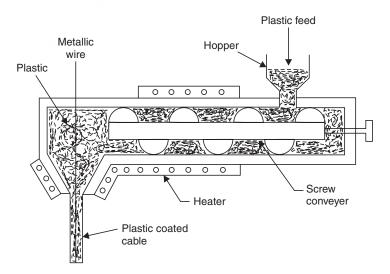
Moulding of insulated electric cable by vertical extrusion moulding.
